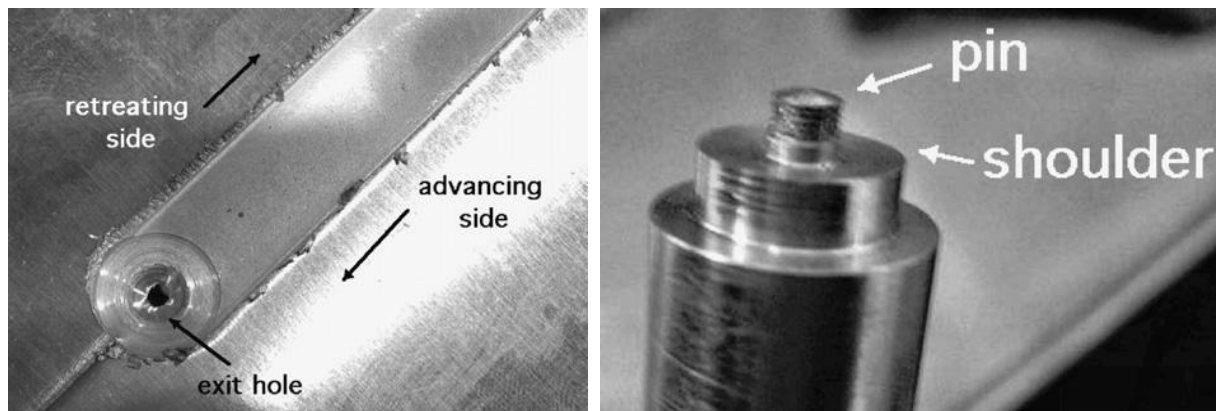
A FSW weld between two aluminium sheets, and a tool piece with a threaded pin [35]
